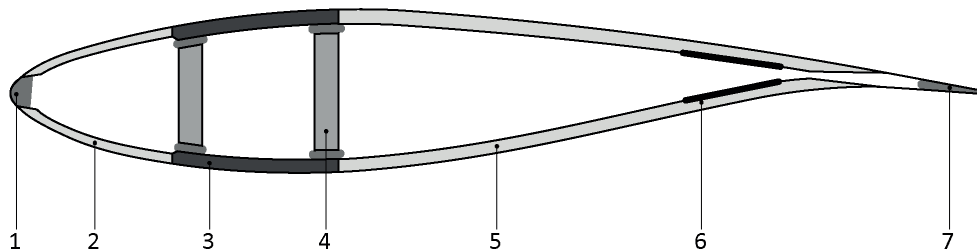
Cross-sectional profile of a wind turbine blade, showing parts and structural design.
